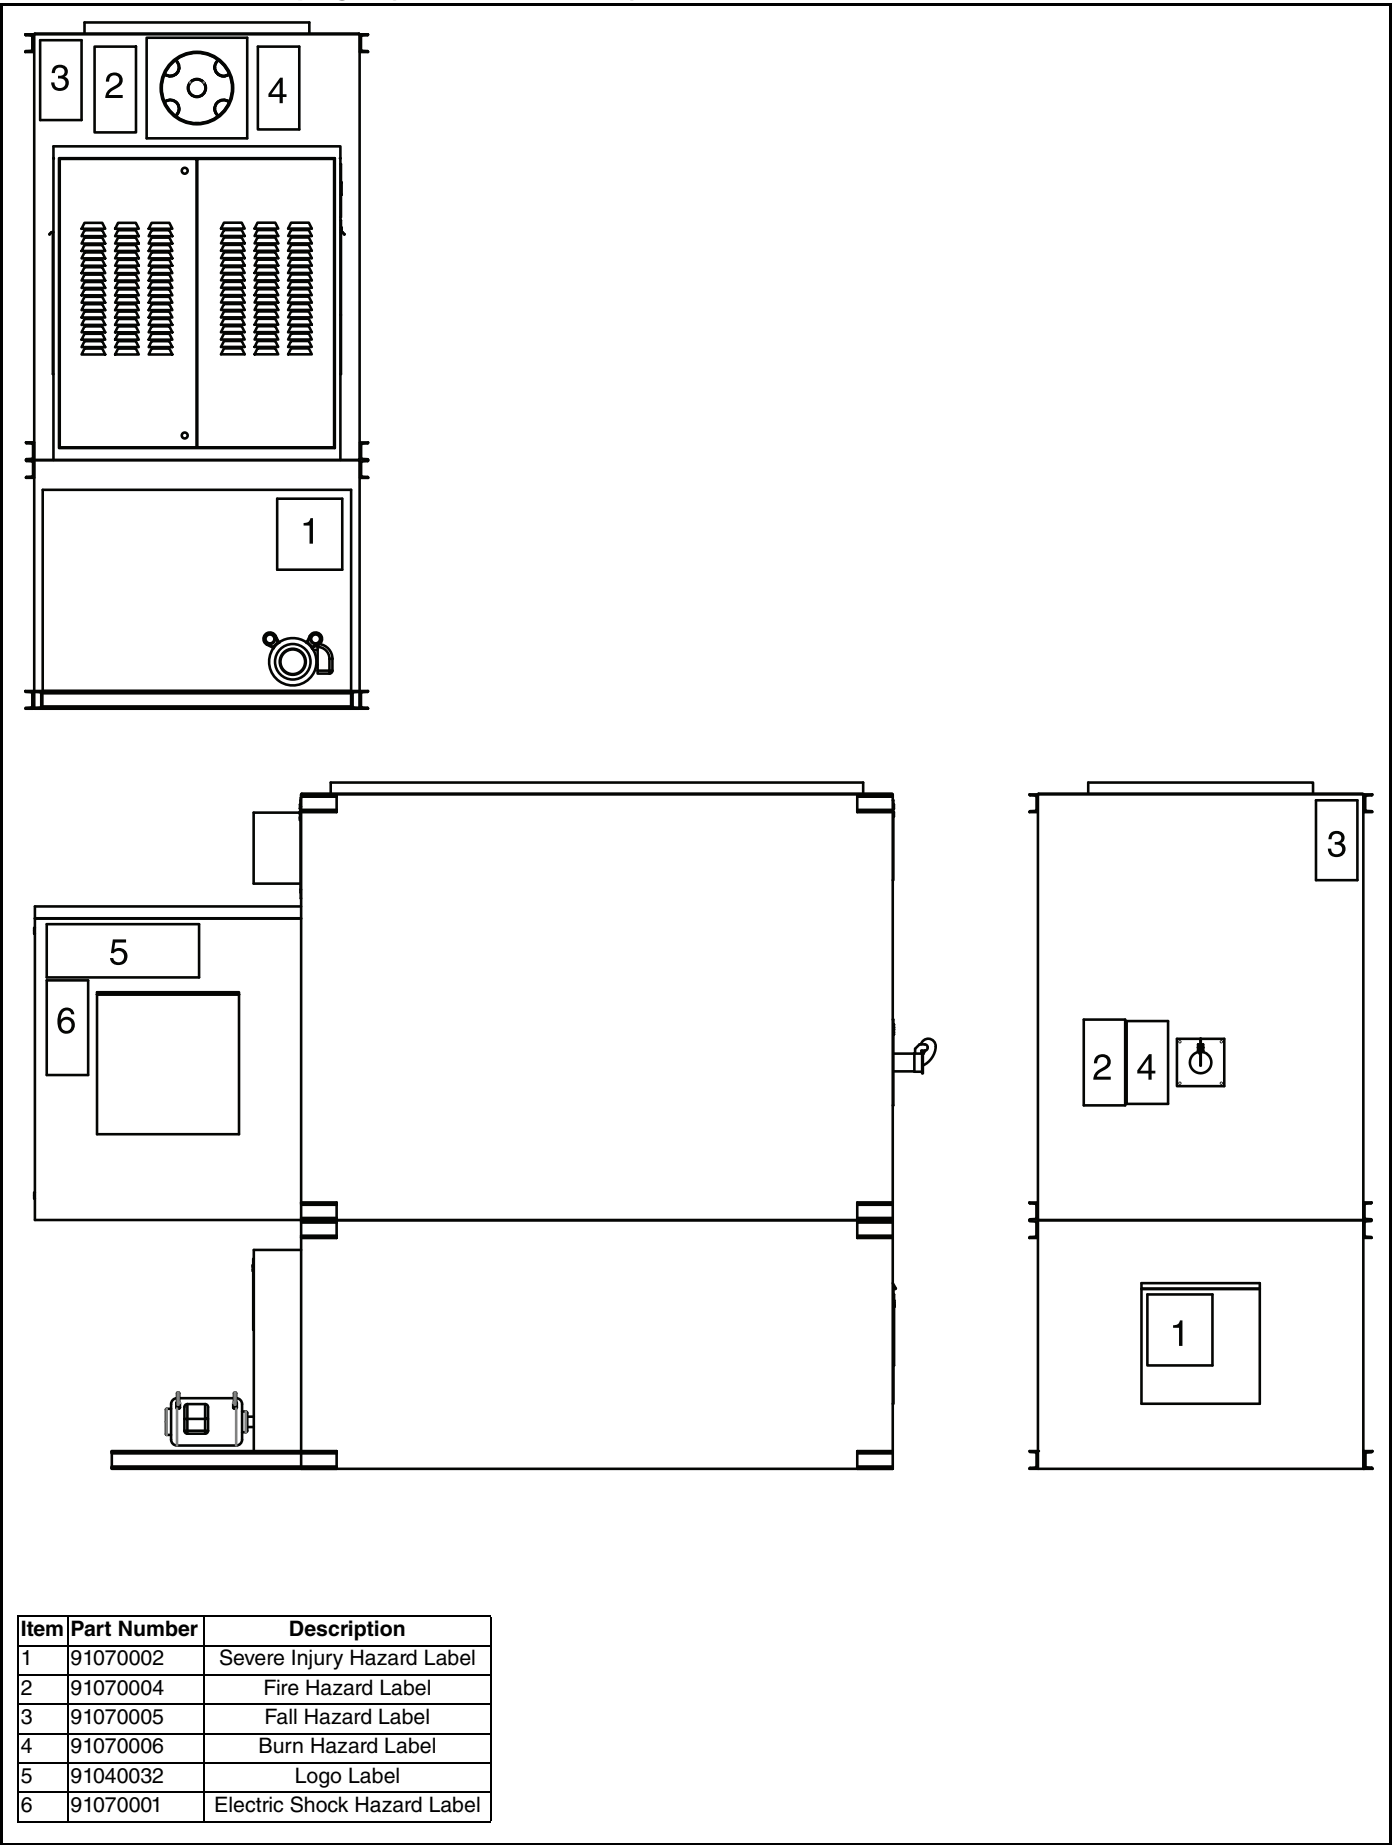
Outdoor Horizontal (Models 35 - 100)
